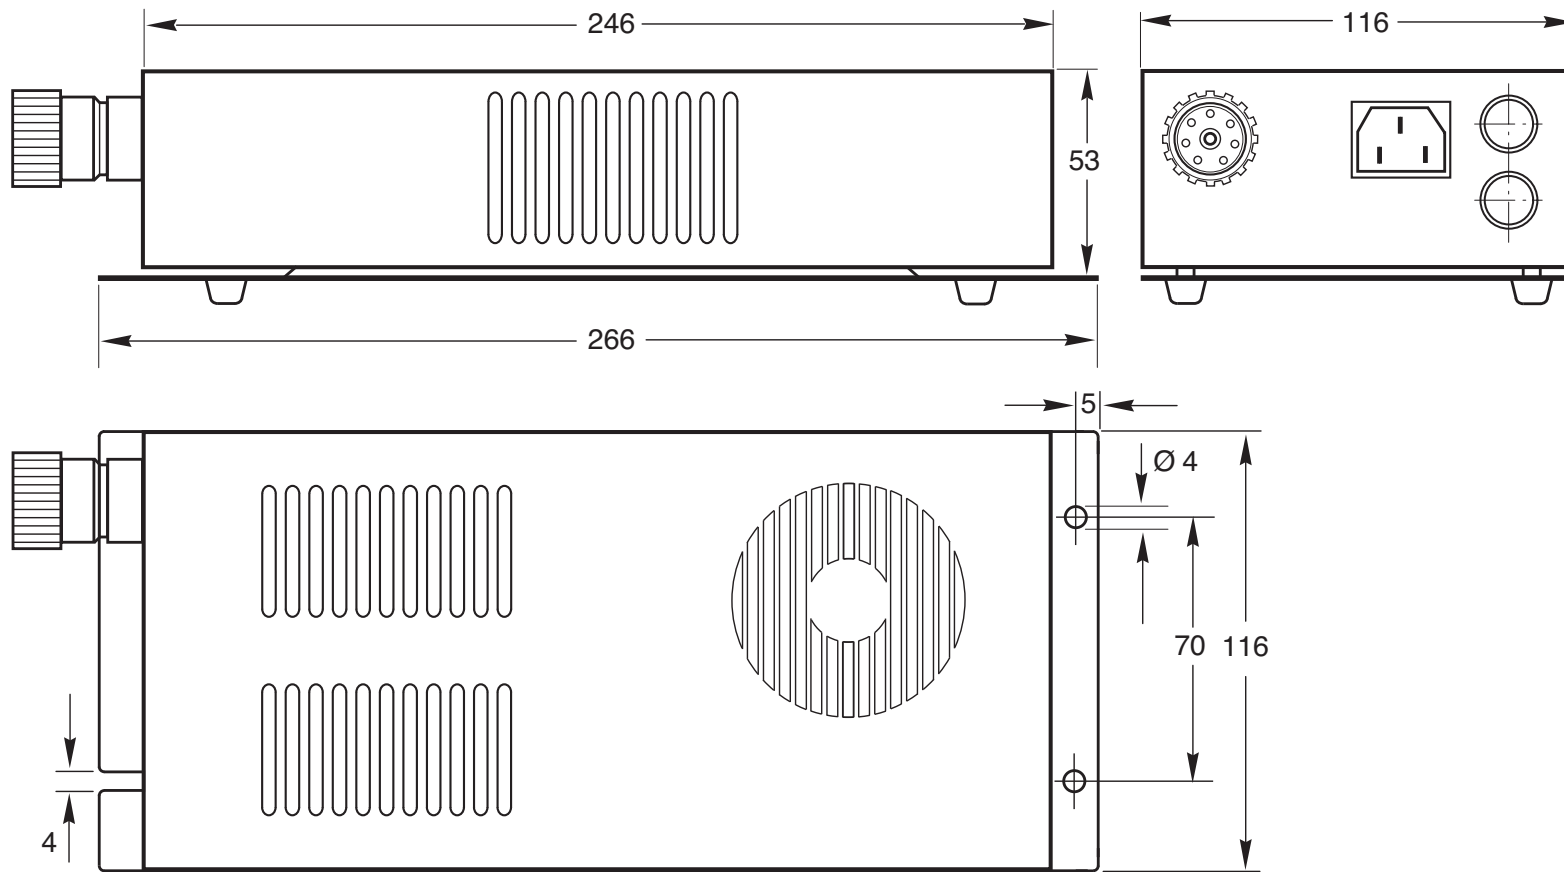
Dimensional drawing for TURBO.POWER 300; dimensions in mm
